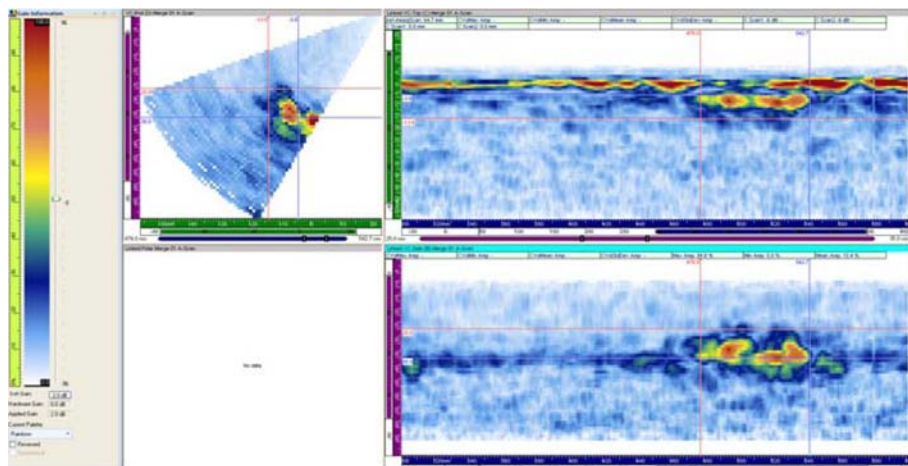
Specimen 9C-034 Flaw 4 After Weld Crown Removal at 2 MHz
